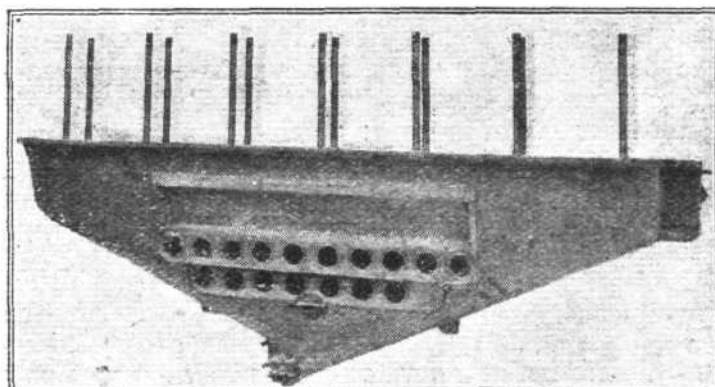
Side view of bottom half of crank case, showing air-cooling tubes.
